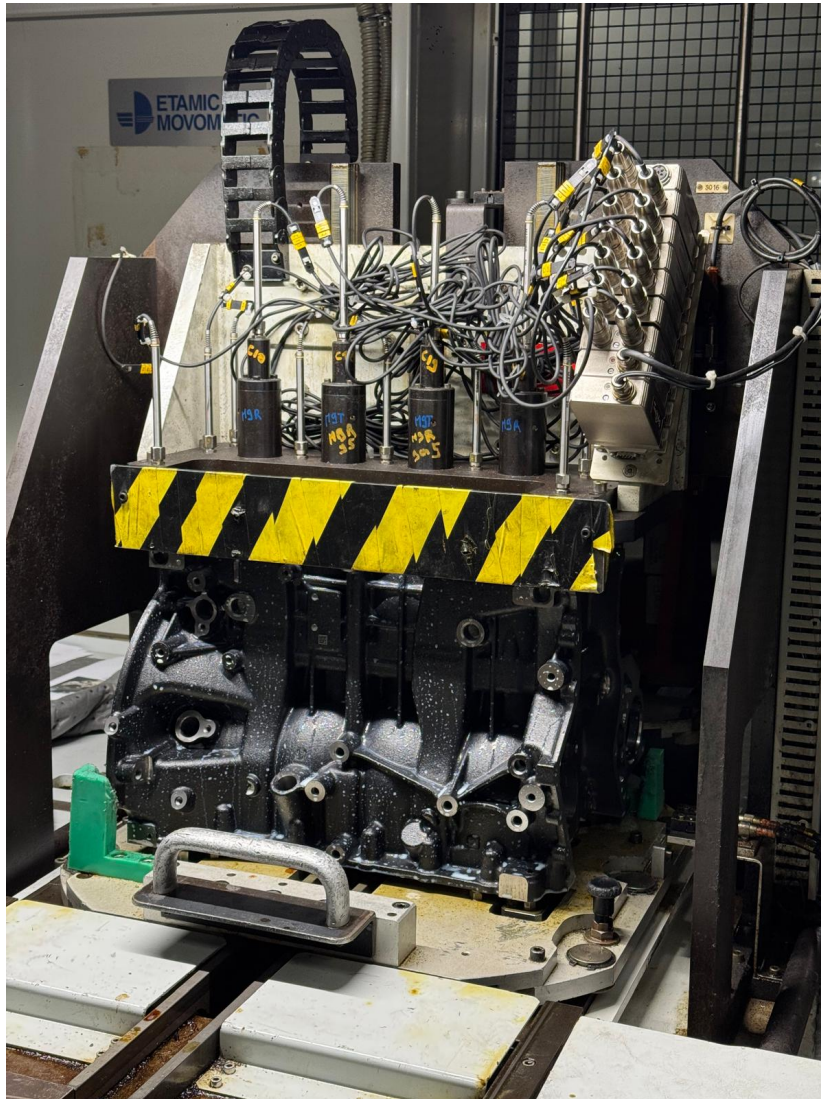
M9R diesel cylinder block positioned on the ETAMIC MOVOMATIC dimensional inspection machine.
